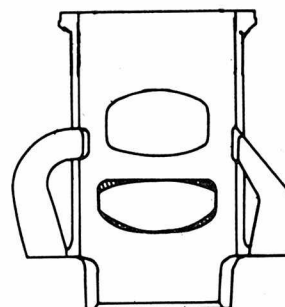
Intake may be enlarged by removing metal from shaded areas. Do not raise top edge or lower bottom edge of port.
